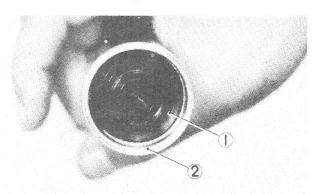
When disassembling the forks on YT 200 models, depress the spring seat (1) and remove the stopper ring (2) with a small screwdriver (Sec 5)
